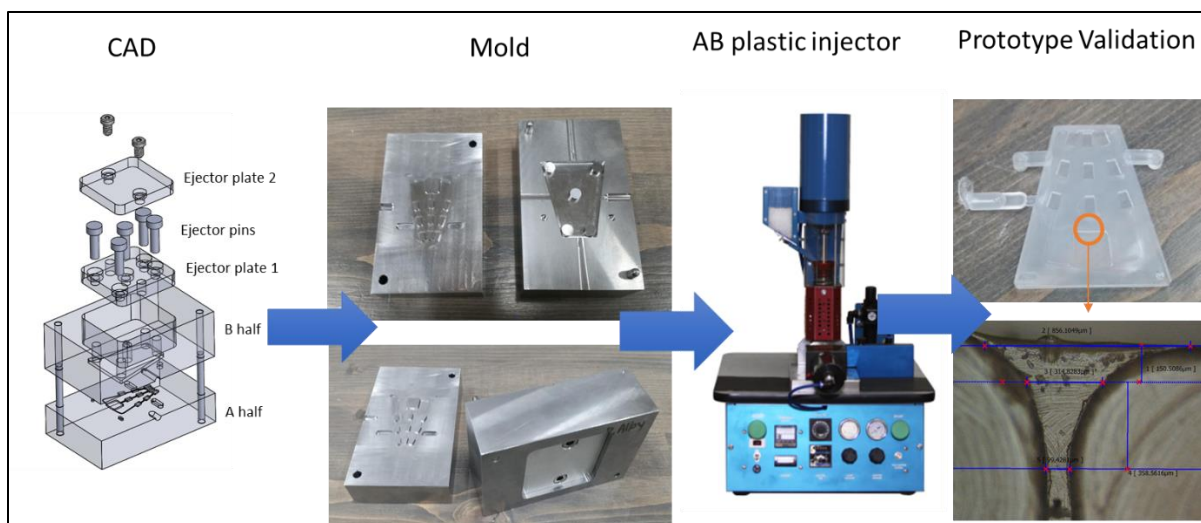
Process for producing molded parts of this work: left to right – 3D Model of mold components, machining of physical mold, molding of plastic granules plastic injector, measurement and analysis of molded parts
